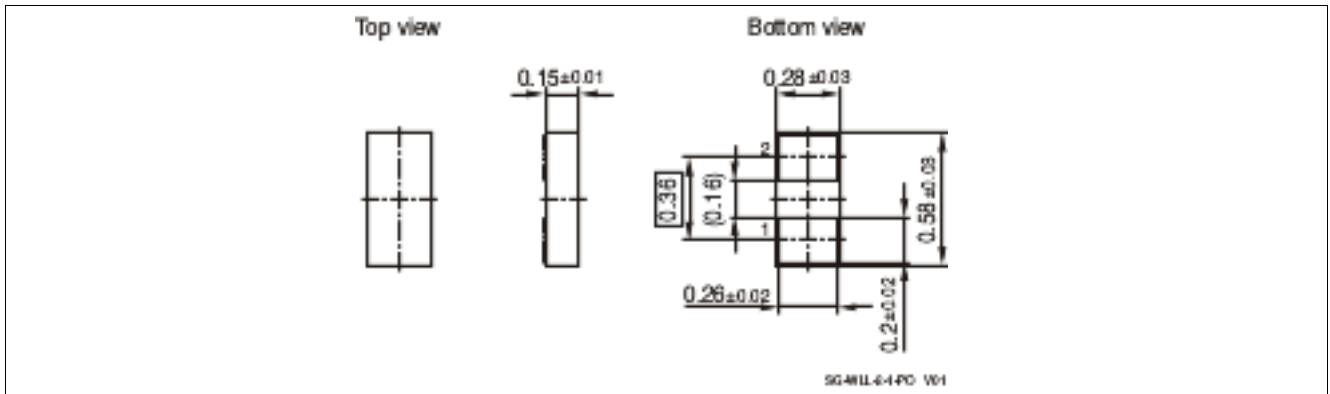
WLL-2-1 Package outline (dimension in mm)
